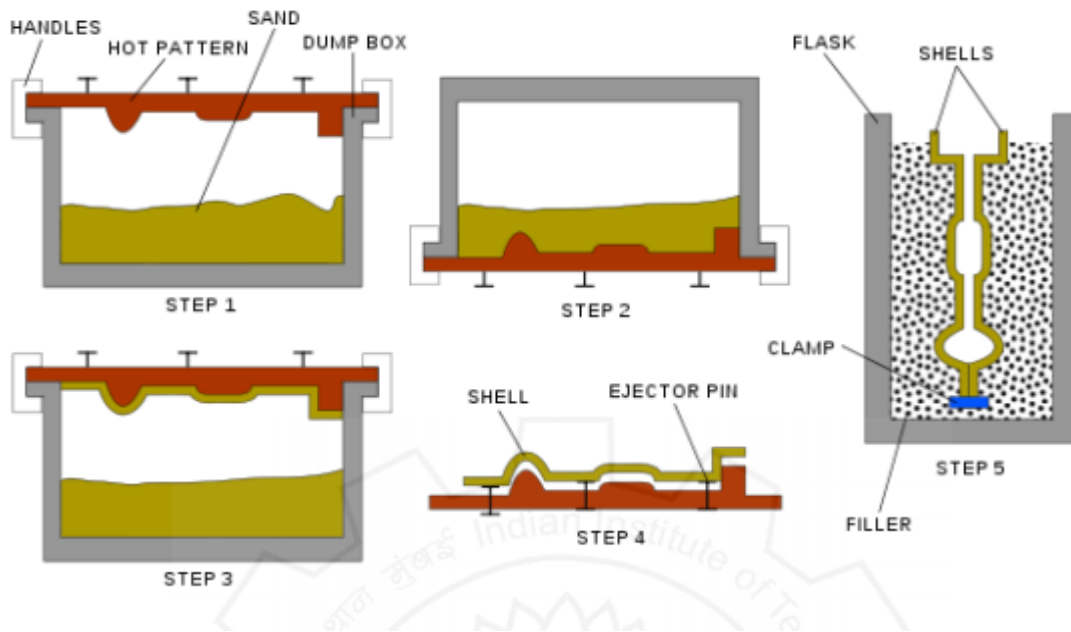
Schematic Set-up of Shell Mold Casting Process
